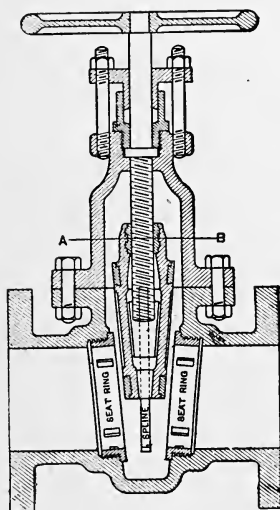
A Typical Gate Valve, Solid-wedge, Bolt-top, Inside Screw.
